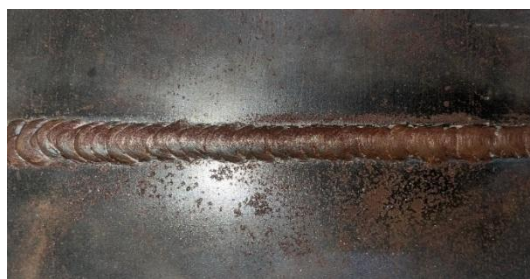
Welding Workpiece (MIG)1 (S1)
